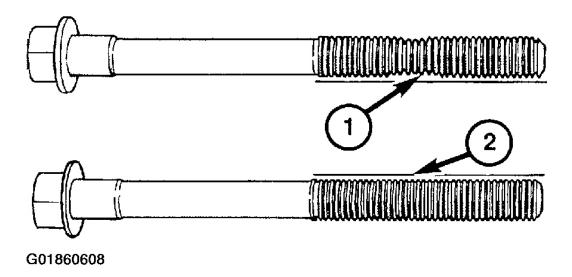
Examining Connecting Rod Bolts Courtesy of DAIMLERCHRYSLER CORP.
